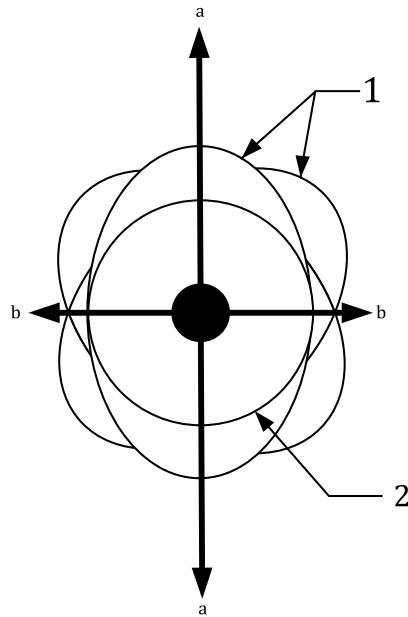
Example of a calibrated upper thread plug gauge (thread failed)
